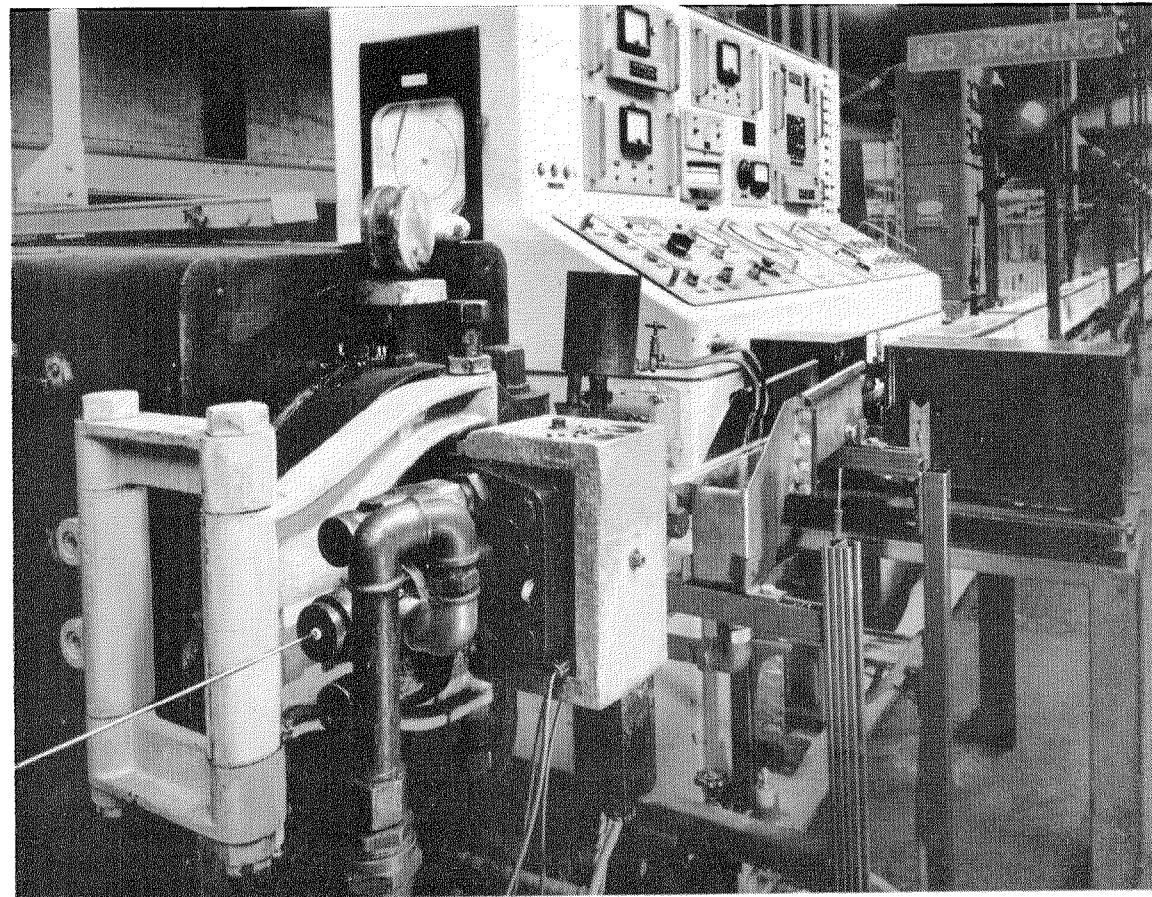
Polythene core extruder. The centre conductor enters at the lower left and is coated with polythene in the extruder head. The coated conductor passes through a light gauge in the two black boxes, which check the diameter, and then into the long cooling trough. The control console is just behind the extruder.
